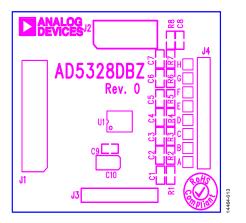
EVAL-AD5328DBZ Daughter Board Component Placement
